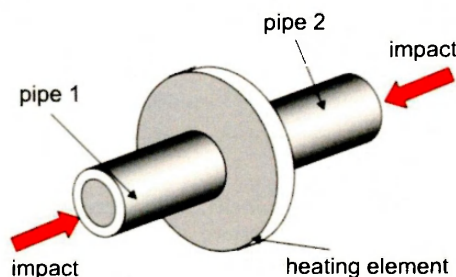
Scheme of technological process of welding of polyethylene pipelines
